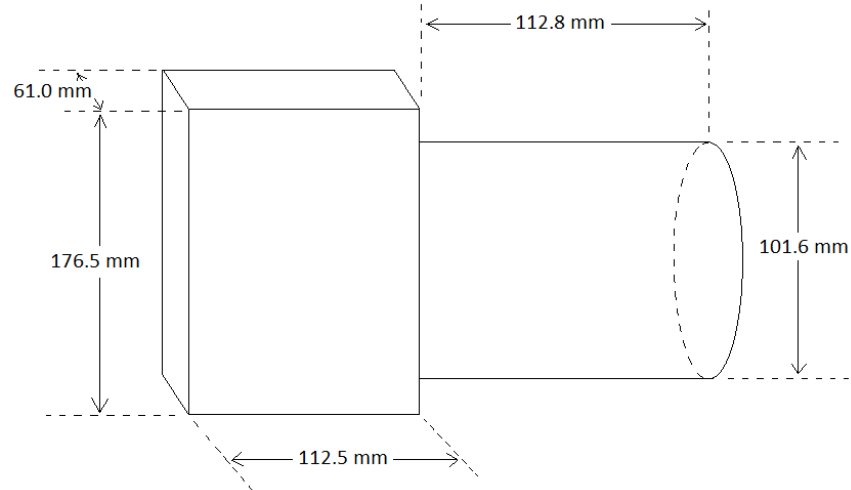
Dimensions of rectangular prism used to represent sonar
